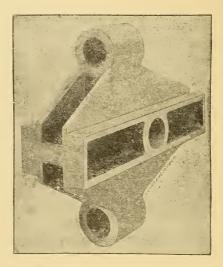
Crosshead, Vauclain Compound Locomotive.
